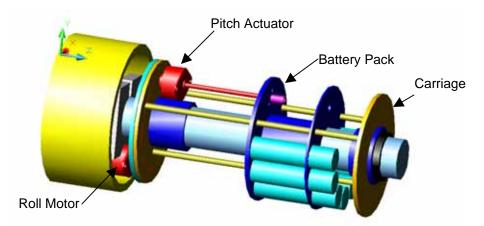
Final Design of Pitch and Roll Mechanism.
